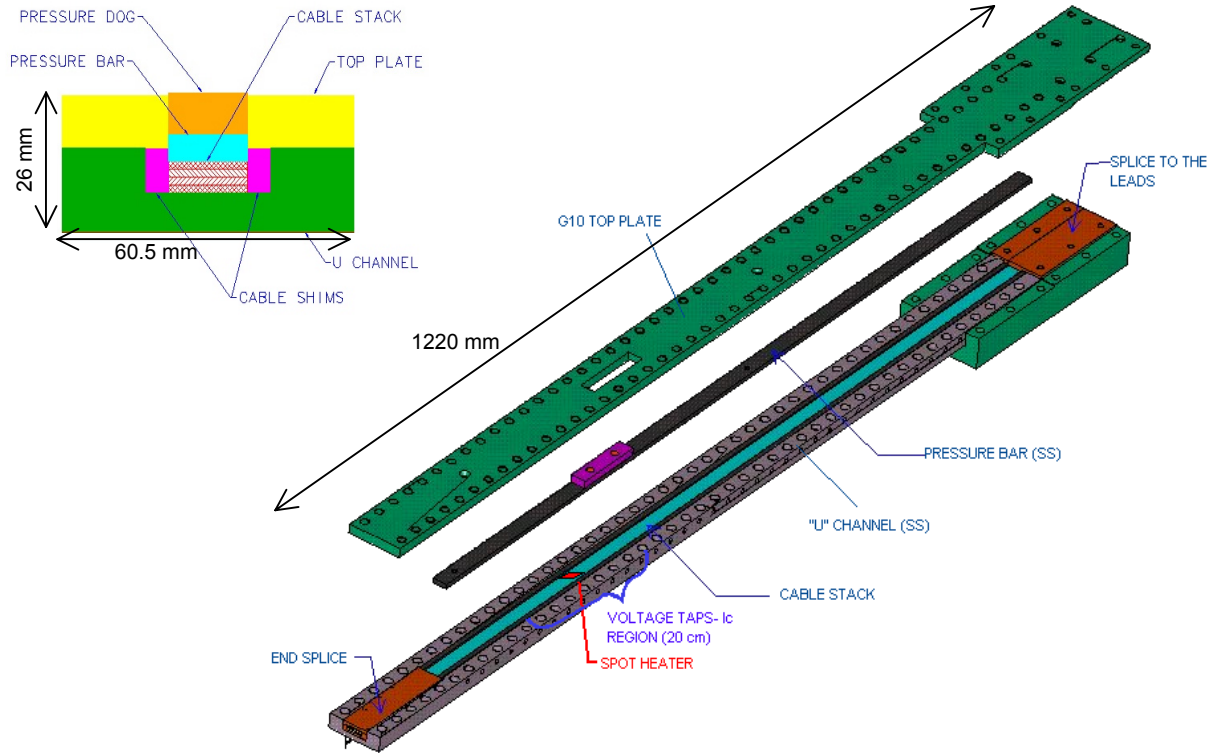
Drawing of the cable sample holder: cross section (on top) and assembly.
